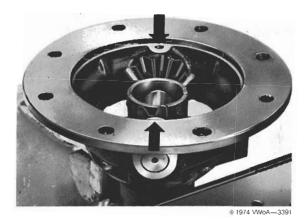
Pinion shaft removal. Drive out first the retaining pin (top arrow) and then the pinion shaft (bottom arrow) in the directions that the arrows indicate
